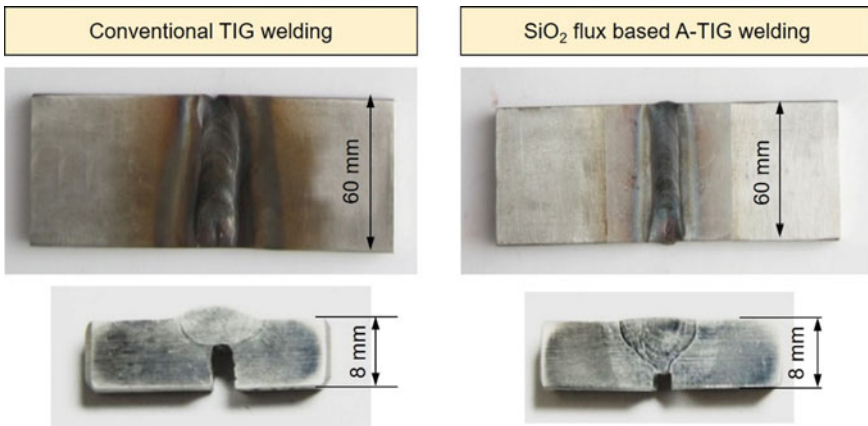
Top view and cross-sectional view of the welded plates obtained through TIG and A-TIG welding (indicative dimensions are also given)
